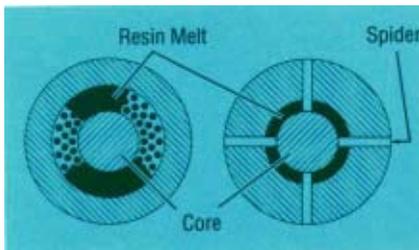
Left: perforated (breaker plate); Right: spider (cross-piece type of core support in a blow molding die).
